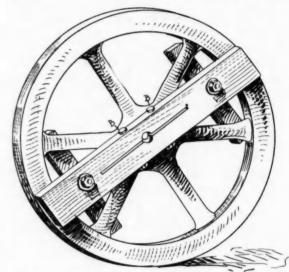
Gas Engine Fly Wheel With Auger Holder Attached
